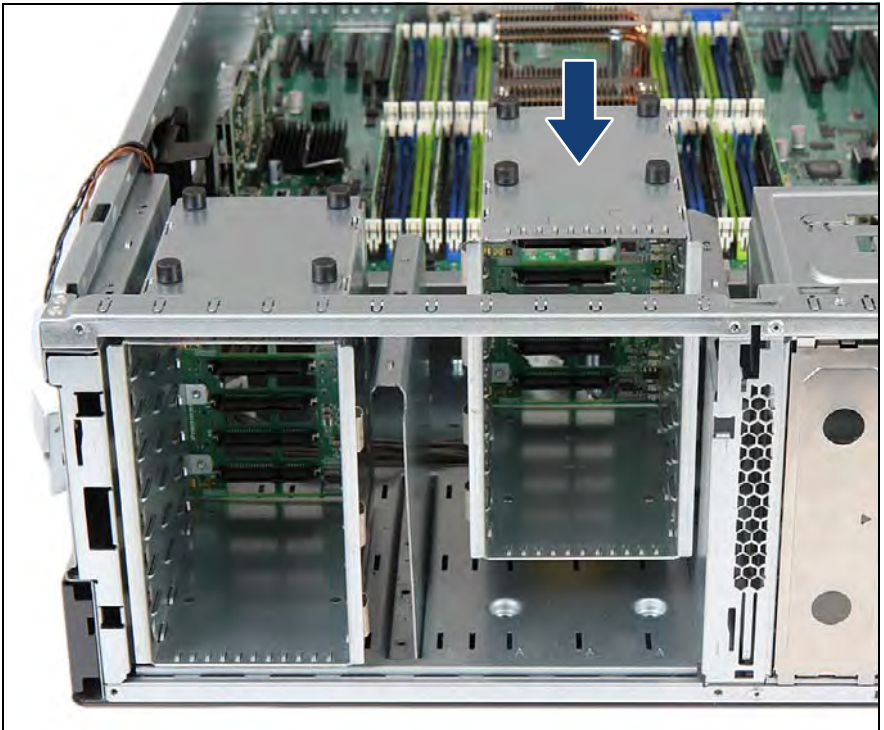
Mounting the second 2.5-inch HDD drive cage (B)
